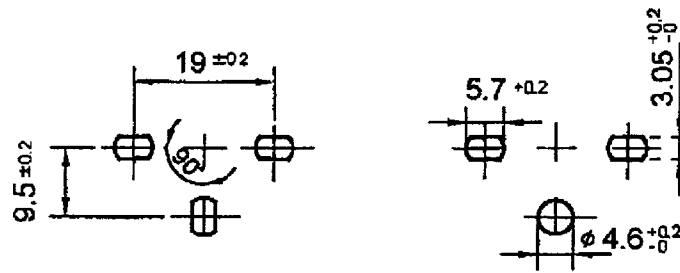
Dimensions of holes in special purpose socket-outlet cover
